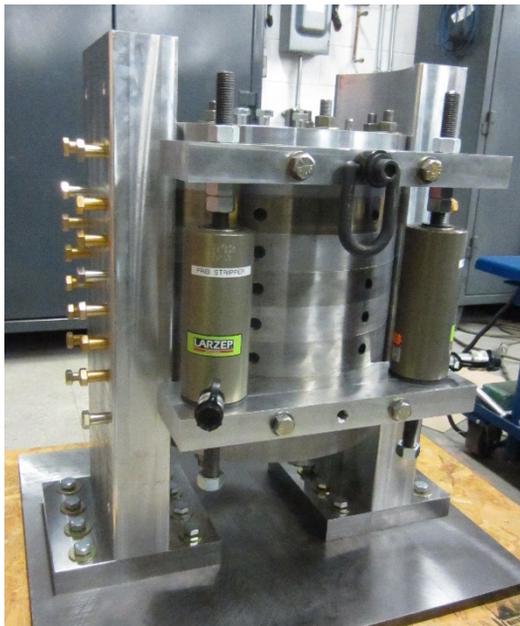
Liquid lithium pump during assembly. The hydraulic cylinders (only two are shown) are removed after final assembly.
